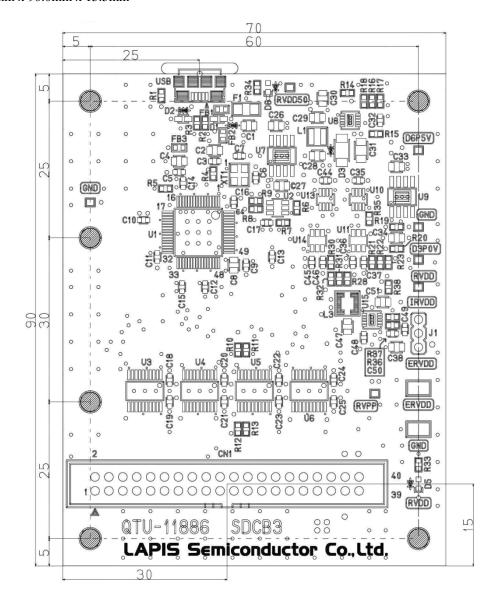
PCB dimensional outline diagram and layout of components (Top view)
